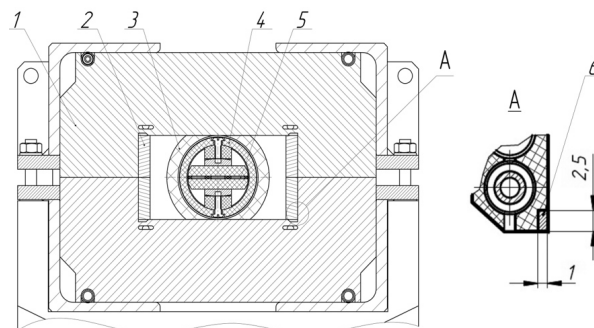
Cross-section view of dipole magnet for the NICA collider with MMS: 1. Yoke, 2. Main coil, 3. Plain bearing of measurement shaft, 4. Measurement shaft, 5. PCB with harmonic coils, 6. Reference coil.
